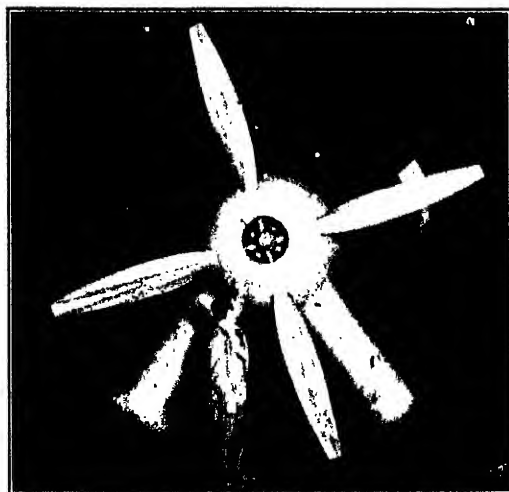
PROPELLER END OF MAIN MOTOR WITH FAIRING COMPLETED
